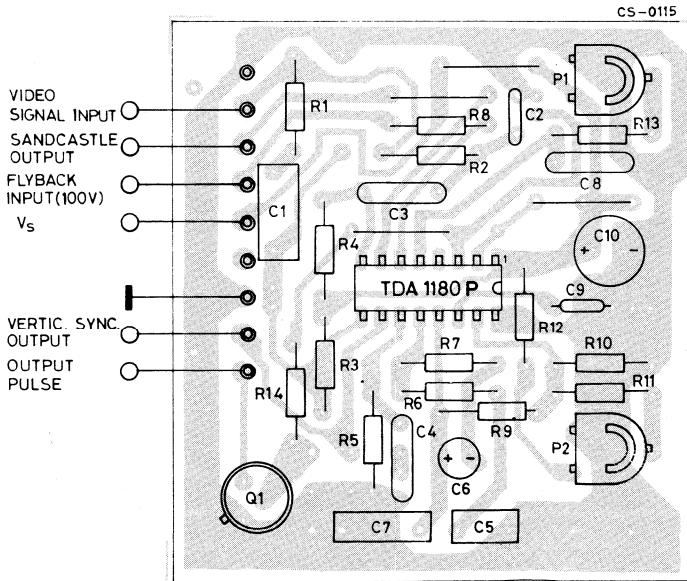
P.C. board and component layout for the circuit in fig. 6 (1:1 scale)
